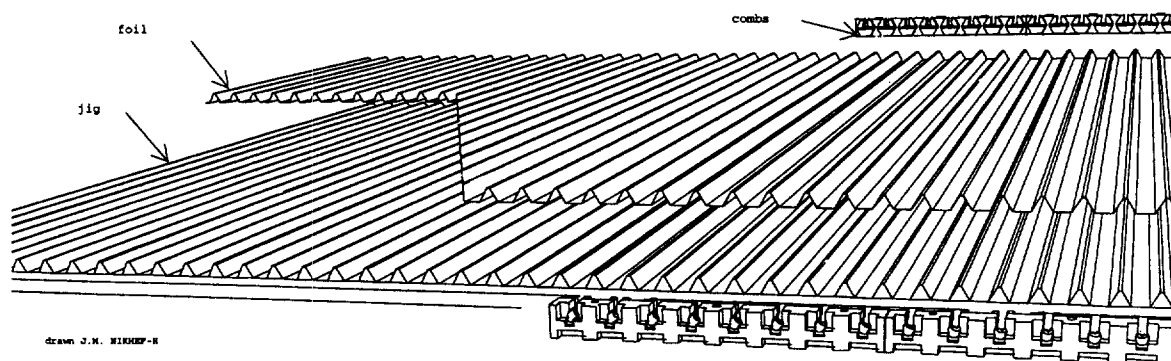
Schematic assembly of monolayer: foil-template and end-combs are shown.
